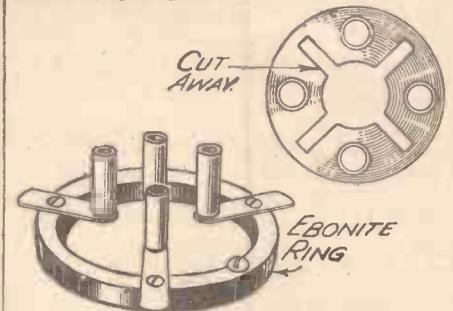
Valve-holders may be converted or constructed as shown here.
